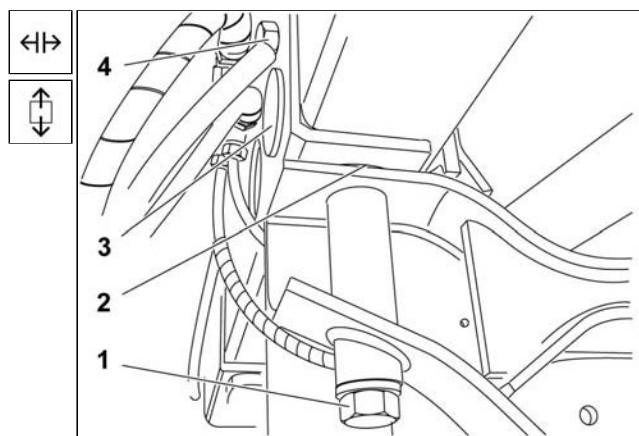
Mounting of ladder-type frame to the front cross girder - removal
